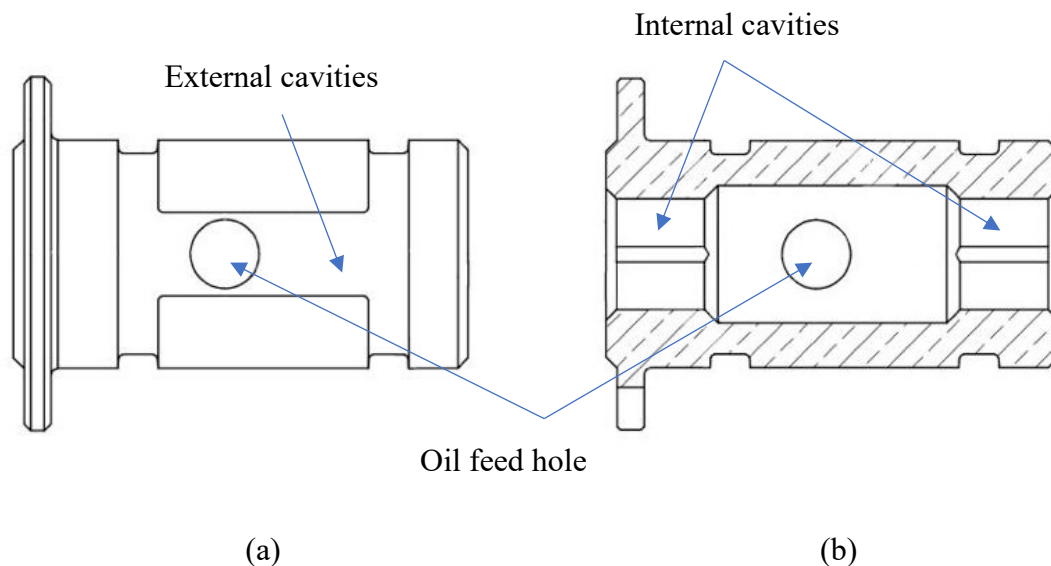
Journal bearing lateral view: (a) external; (b) internal
